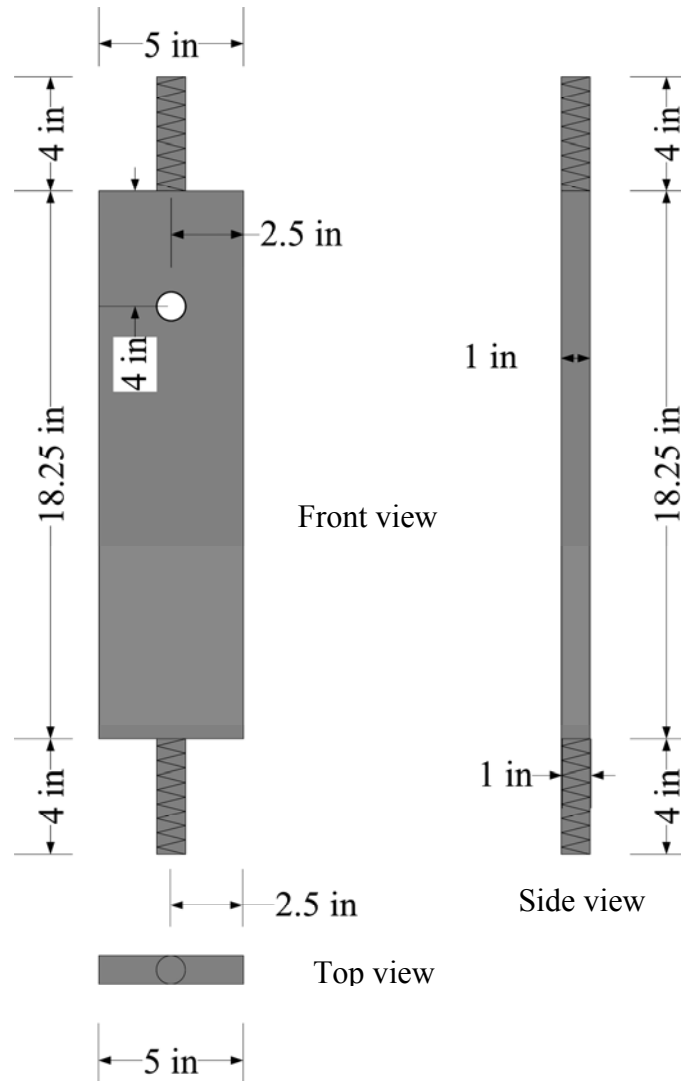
Rectangular steel column used for hosting the cantilever beam.
